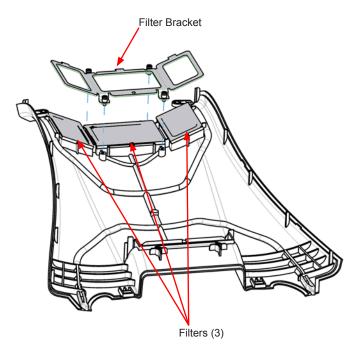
Lower Front Panel - Filter Bracket and Filter Removal
